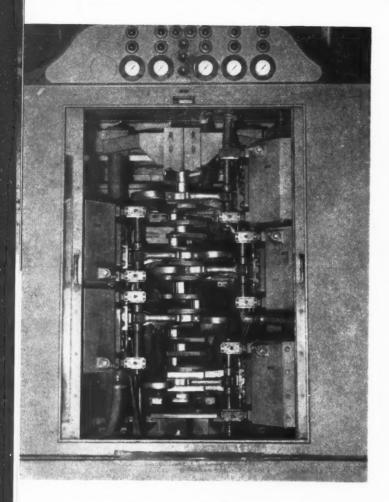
Placing a seven-bearing, six-throw crankshaft in the vertical fixture of a 200-K.W. induction heating machine, preparatory to hardening five of its bearing surfaces
